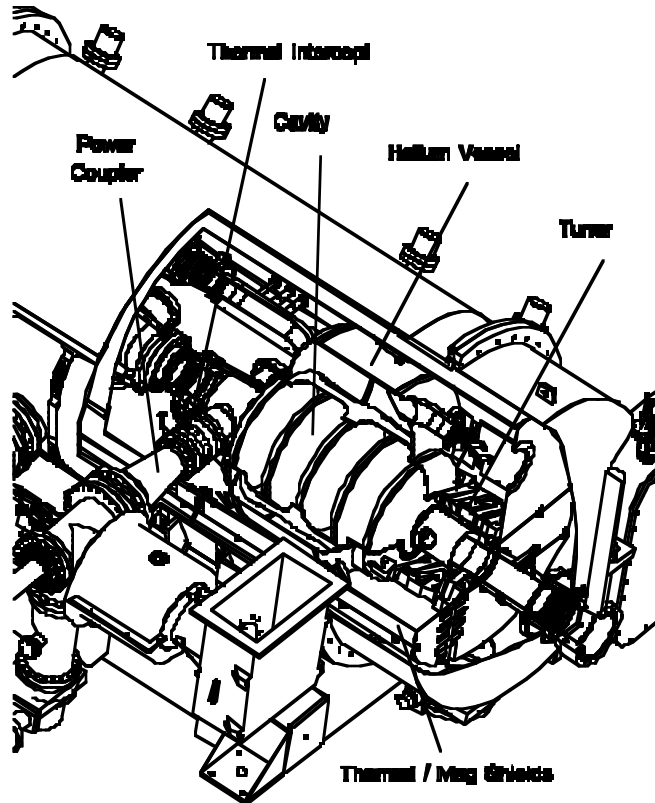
Two-cavity cryomodule isometric with shell cutaway showing internal construction.
